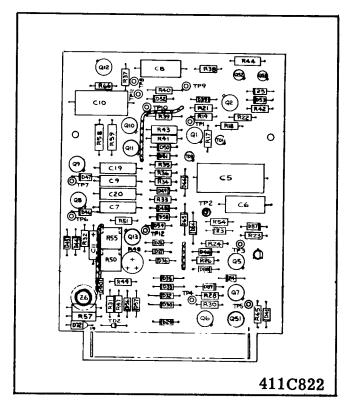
Printed Circuit Board Assembly for SDG-1 Relay
